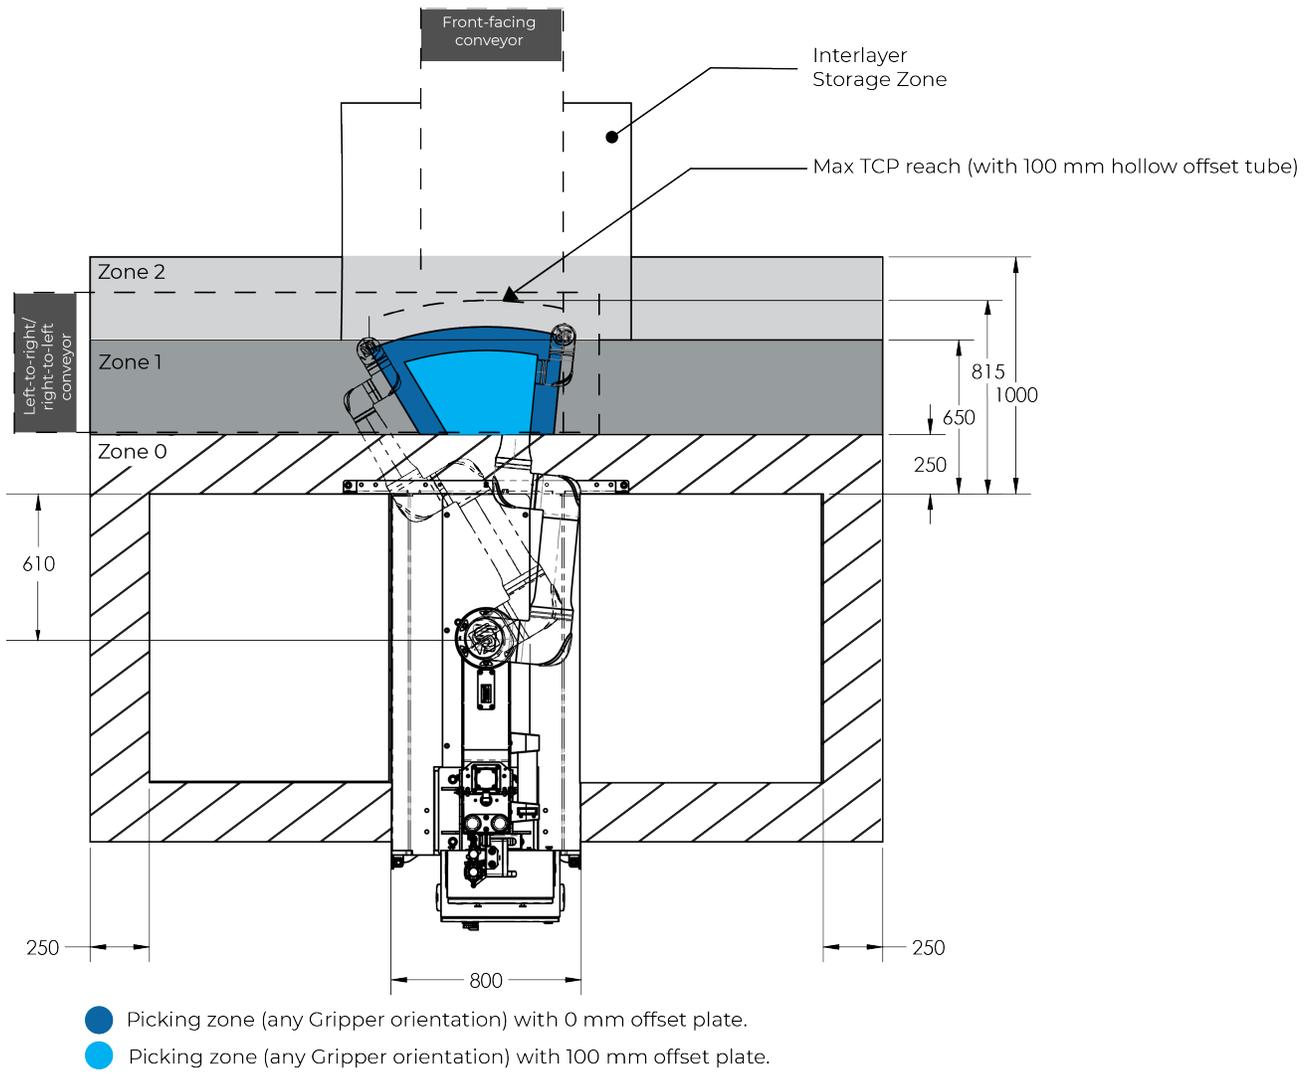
AX30 Palletizing Cell Layout - Top View
